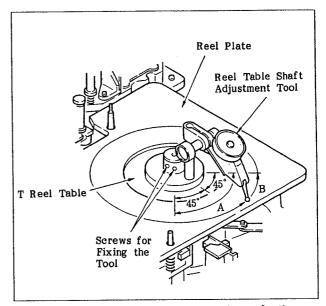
Correcting the Deviation of the Reel Motor Shaft (1)
